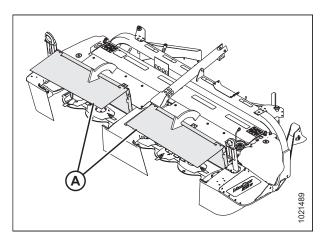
Cutterbar Doors – R113 SP Shown, R116 SP Similar
